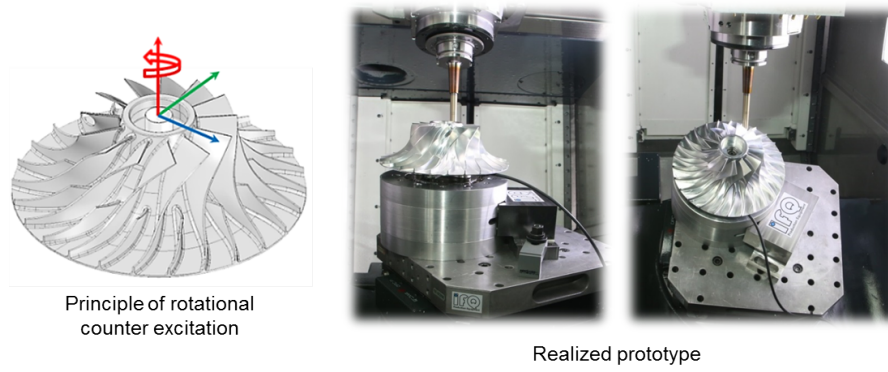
Intelligent impeller fixture prototype (Möhring 2016).
